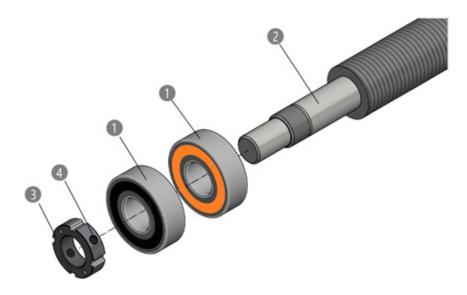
Assembly of axial angular contact ball bearings type BST
